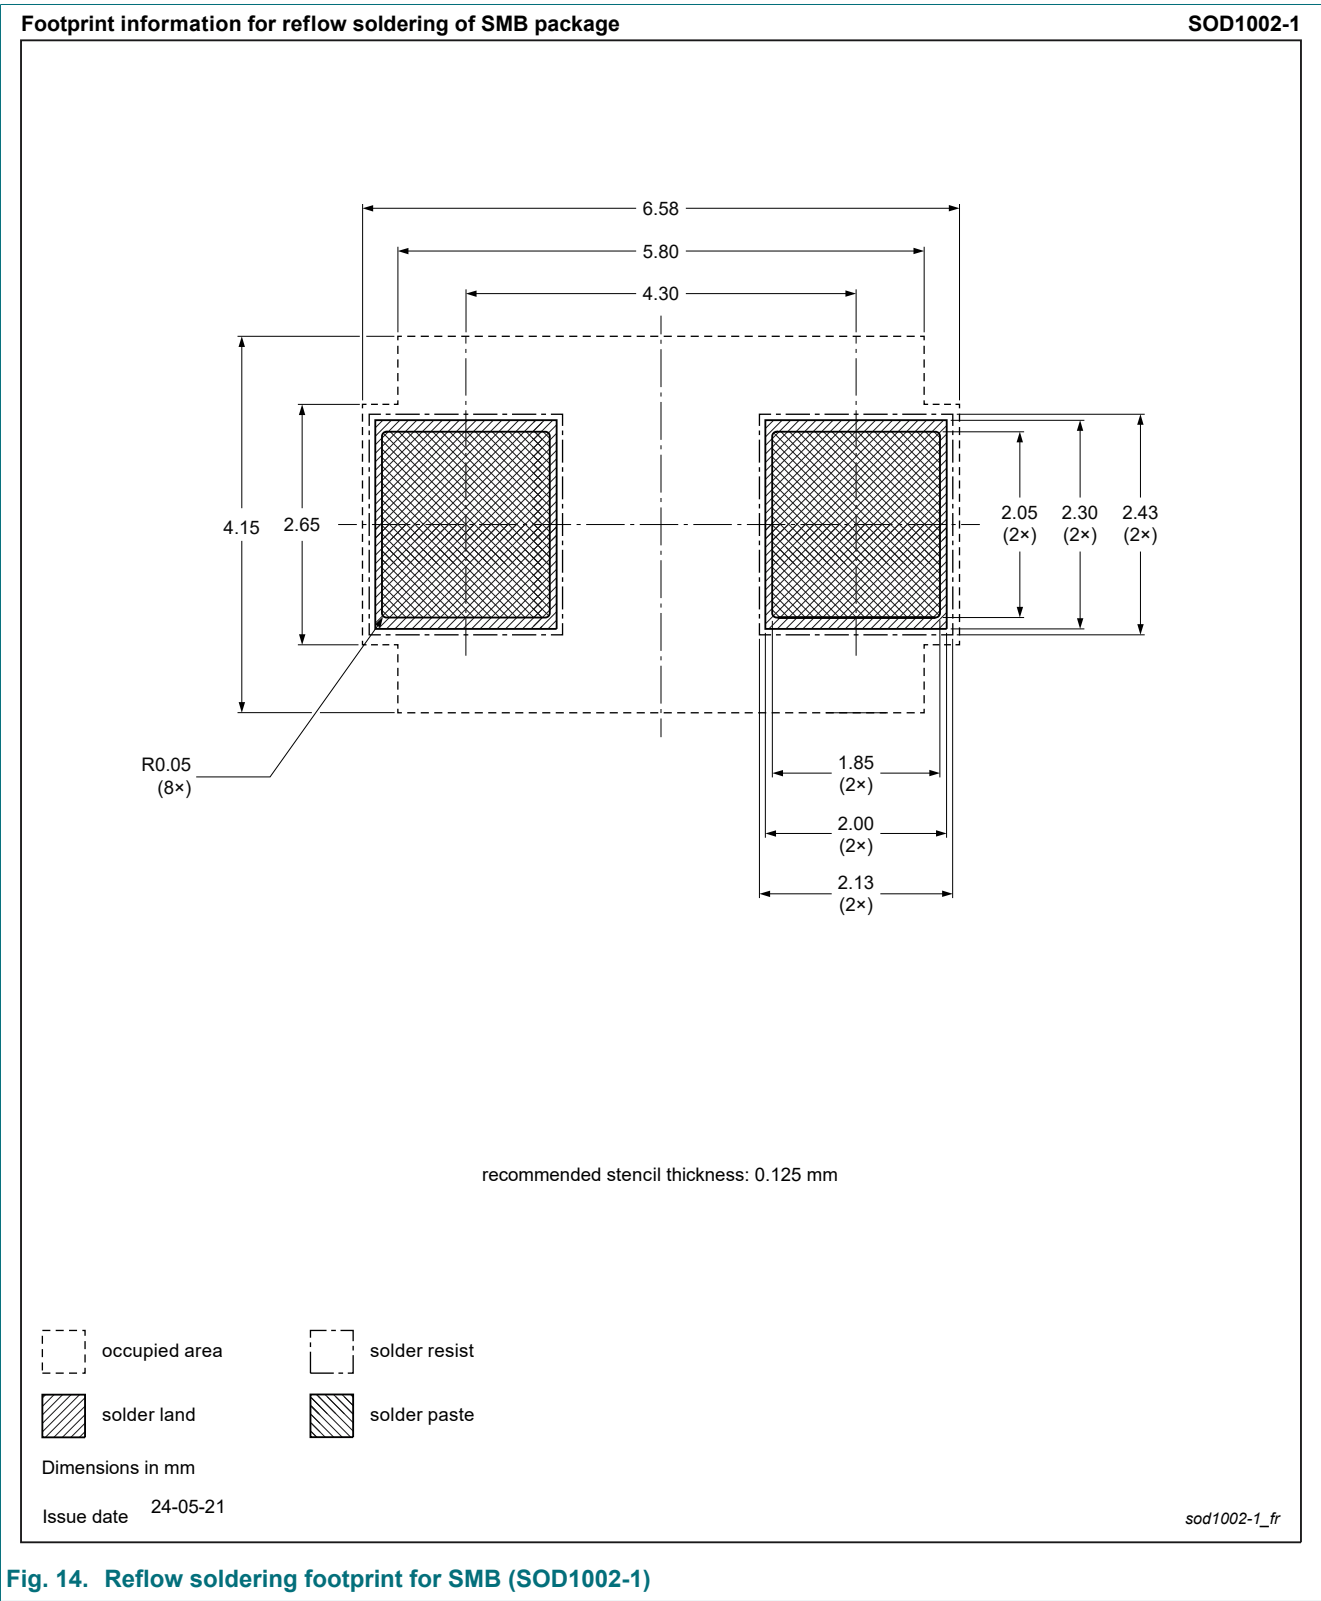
Reflow soldering footprint for SMB (SOD1002-1)
